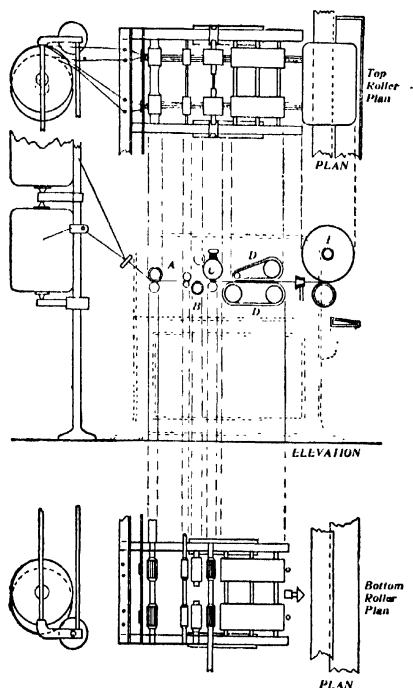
French Drawing Frame in Plan and Elevation.—*A*, back drafting rollers; *B*, porcupine; *C*, front drafting rollers; *D*, rubbing leathers; *E*, balling head.
